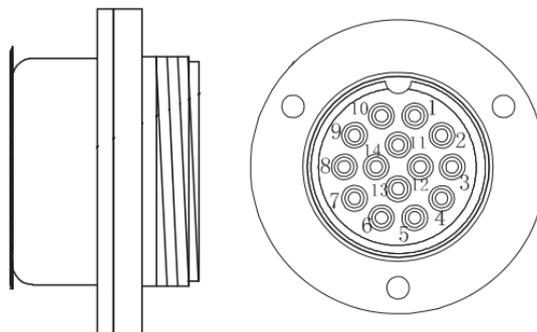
Definitions of 14-core socket pins of welding power source
